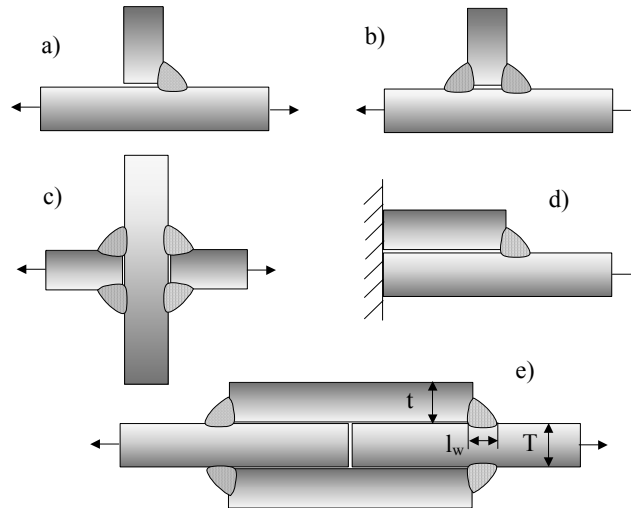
Fillet welds. (a) Non-load carrying, (b) semi-load carrying and (c) load carrying. (d) Fillet welded cover plate. (e) Symmetric splice plate structure used in this study.
